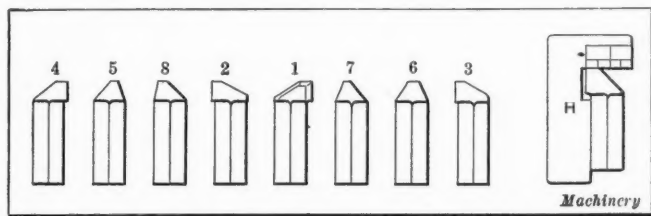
Tools and Gage used with Bar shown in Fig. 2
